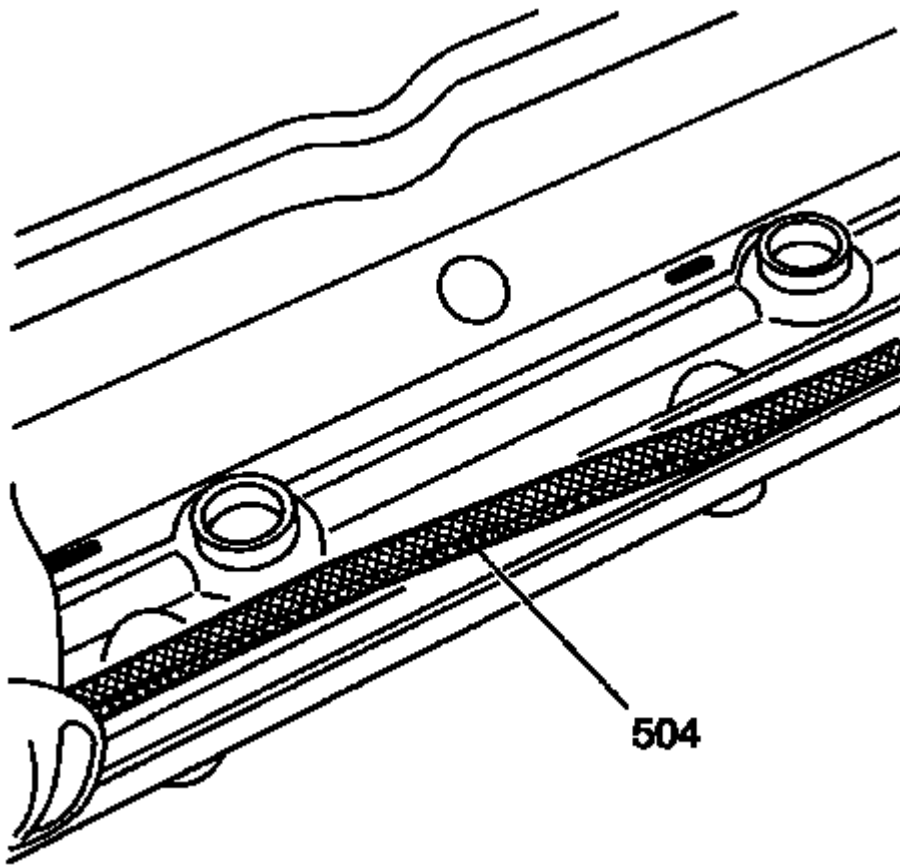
View Of Valve Rocker Arm Cover Gasket
